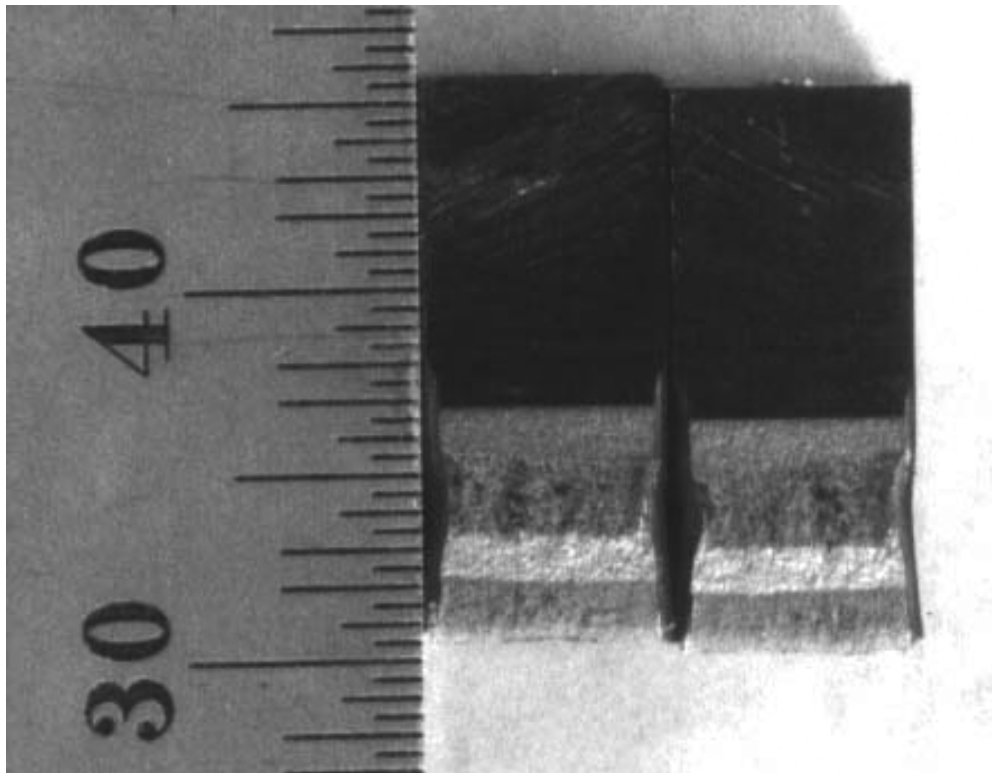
Fracture surface of specimen C19-B tested at 288°C
